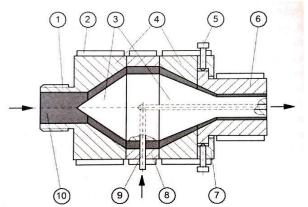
Schematic of an extrusion die for pipe extrusion; 1 – die mounting tip, 2 – heaters, 3 – core, 4 – casing, 5 – centering screw, 6 – forming ring (die nozzle), 7 – centering ring, 8 – core support, 9 – compressed air, 10 – die channel [2].
